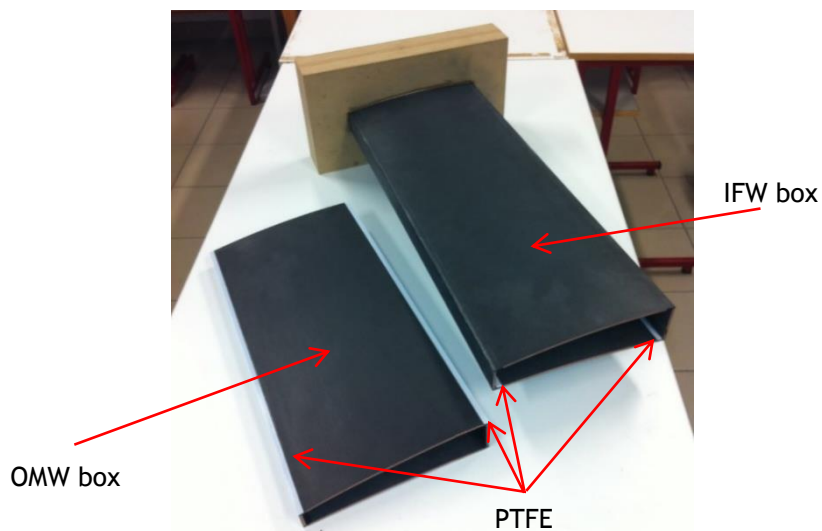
Detailed view of IFW and OMW prototype. Notice the linear guides bonded to the corners of both components
